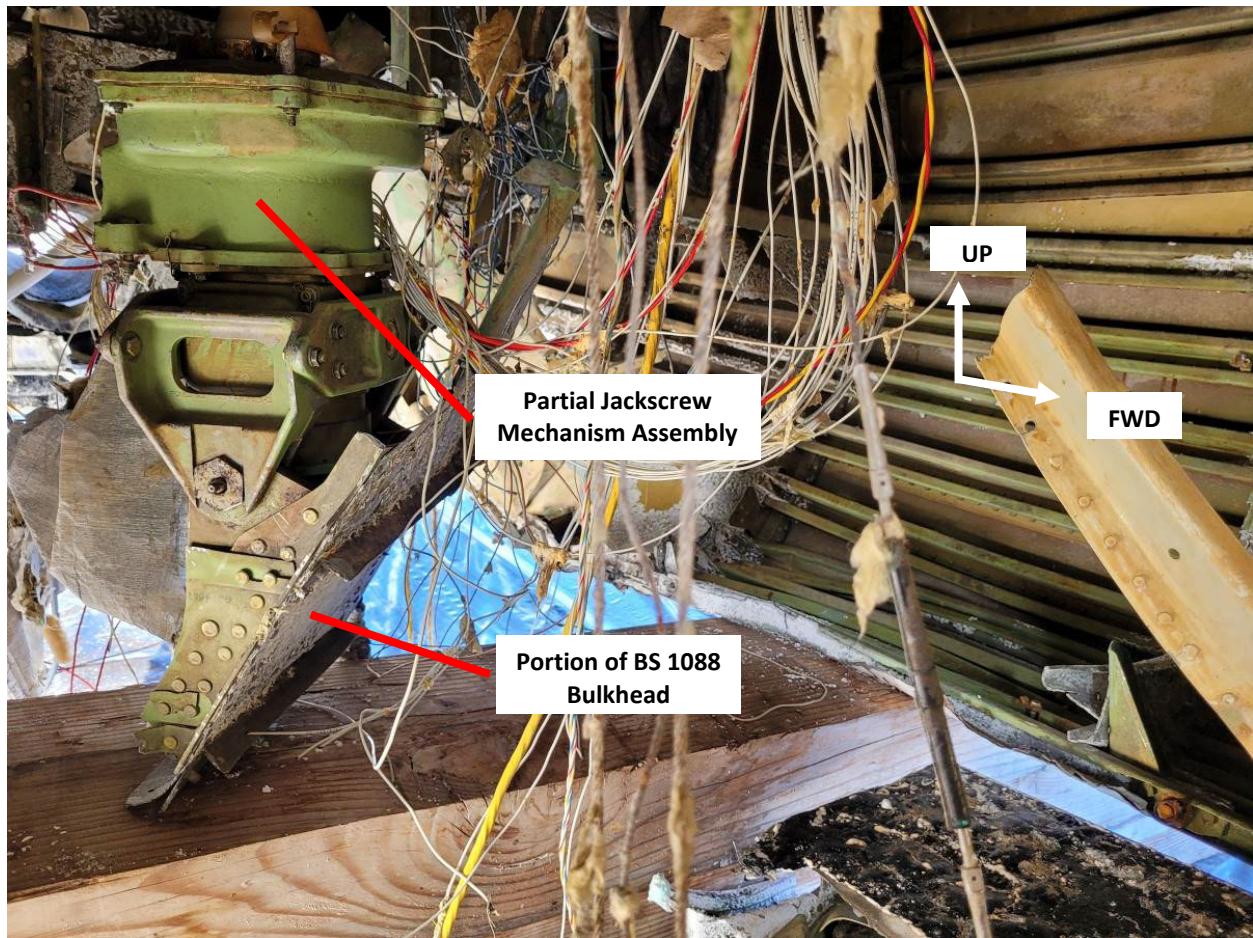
Horizontal Stabilizer Trim Jackscrew lower mechanism (Boeing photo)
